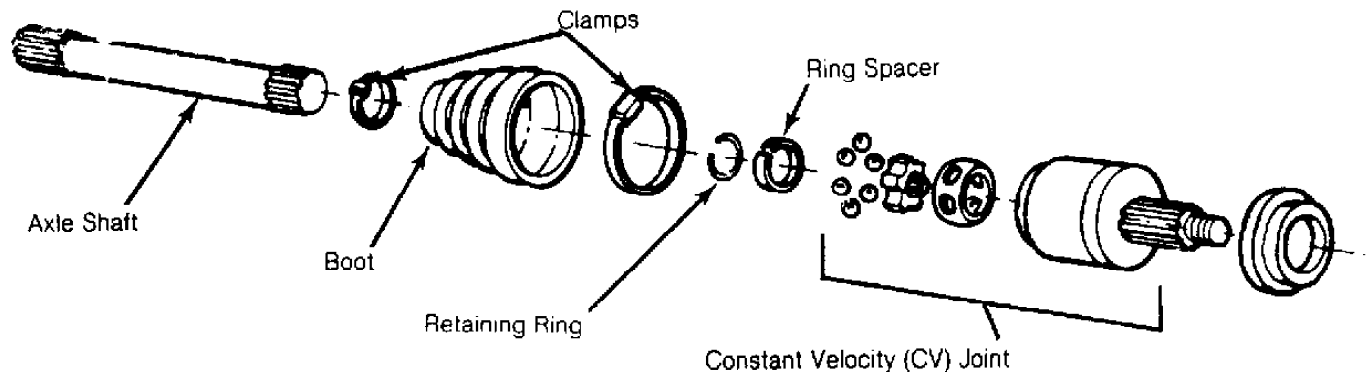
Exploded View of Jeep (Select-Trac) Drive Axle
